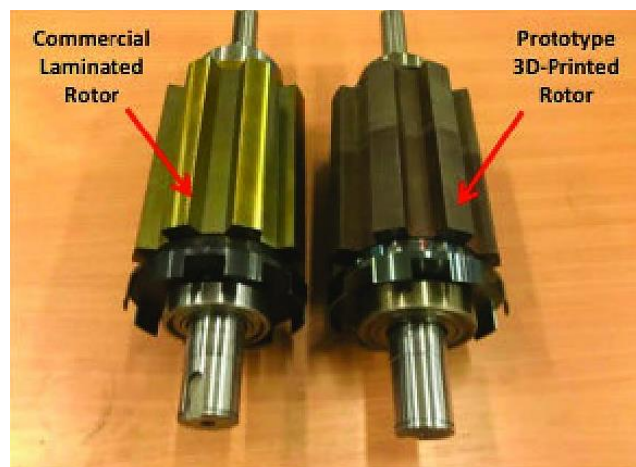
Commercial laminated 8-pole SRM rotor and identical 3D printed rotor
